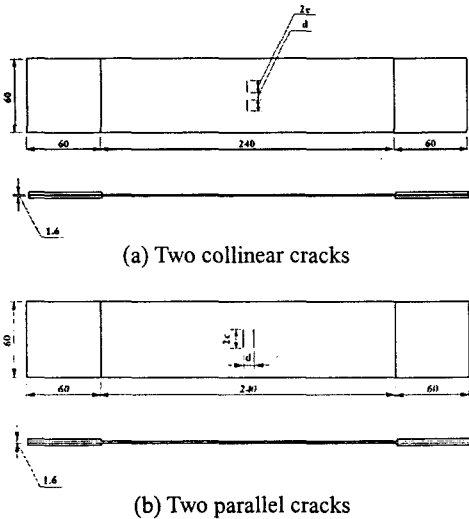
Geometries of tested thin plate containing multiple through-wall cracks
